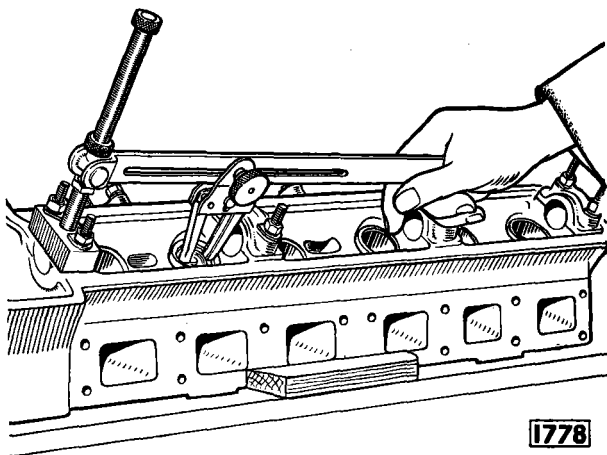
Fitting the valve springs utilising the valve spring compressing tool, Churchill tool No. J.6118.
